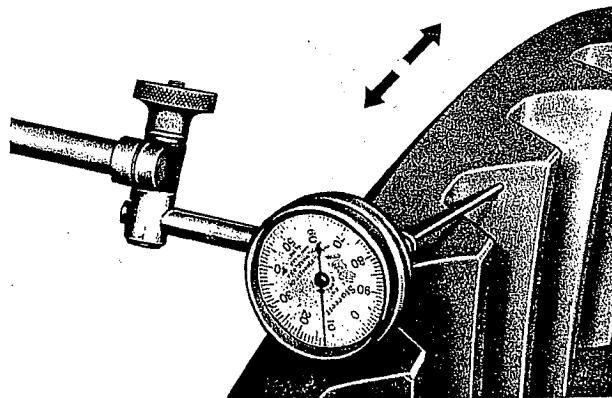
Dial Indicator Measuring Backlash On A Gear
